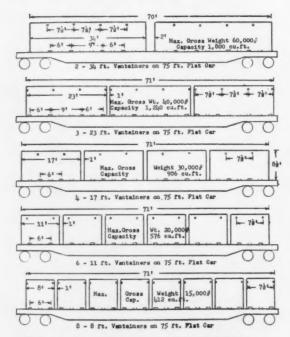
Arrangement of vantainers on 60 ton, 75 ft flat car.
